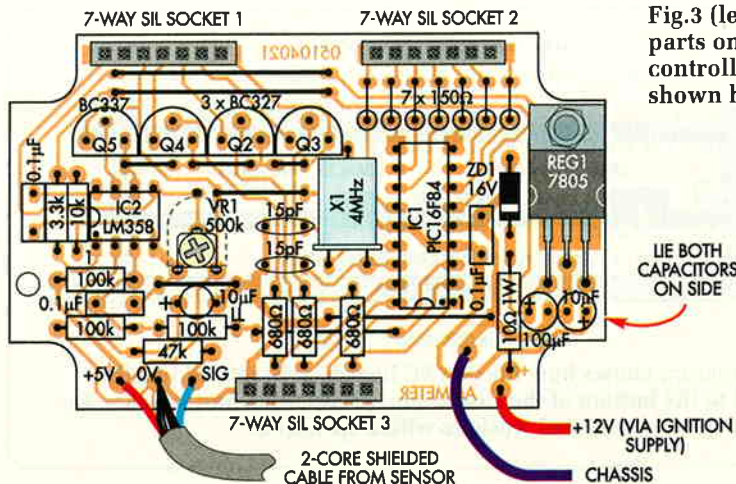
(left): install the parts on the microcontroller PC board as shown here.
